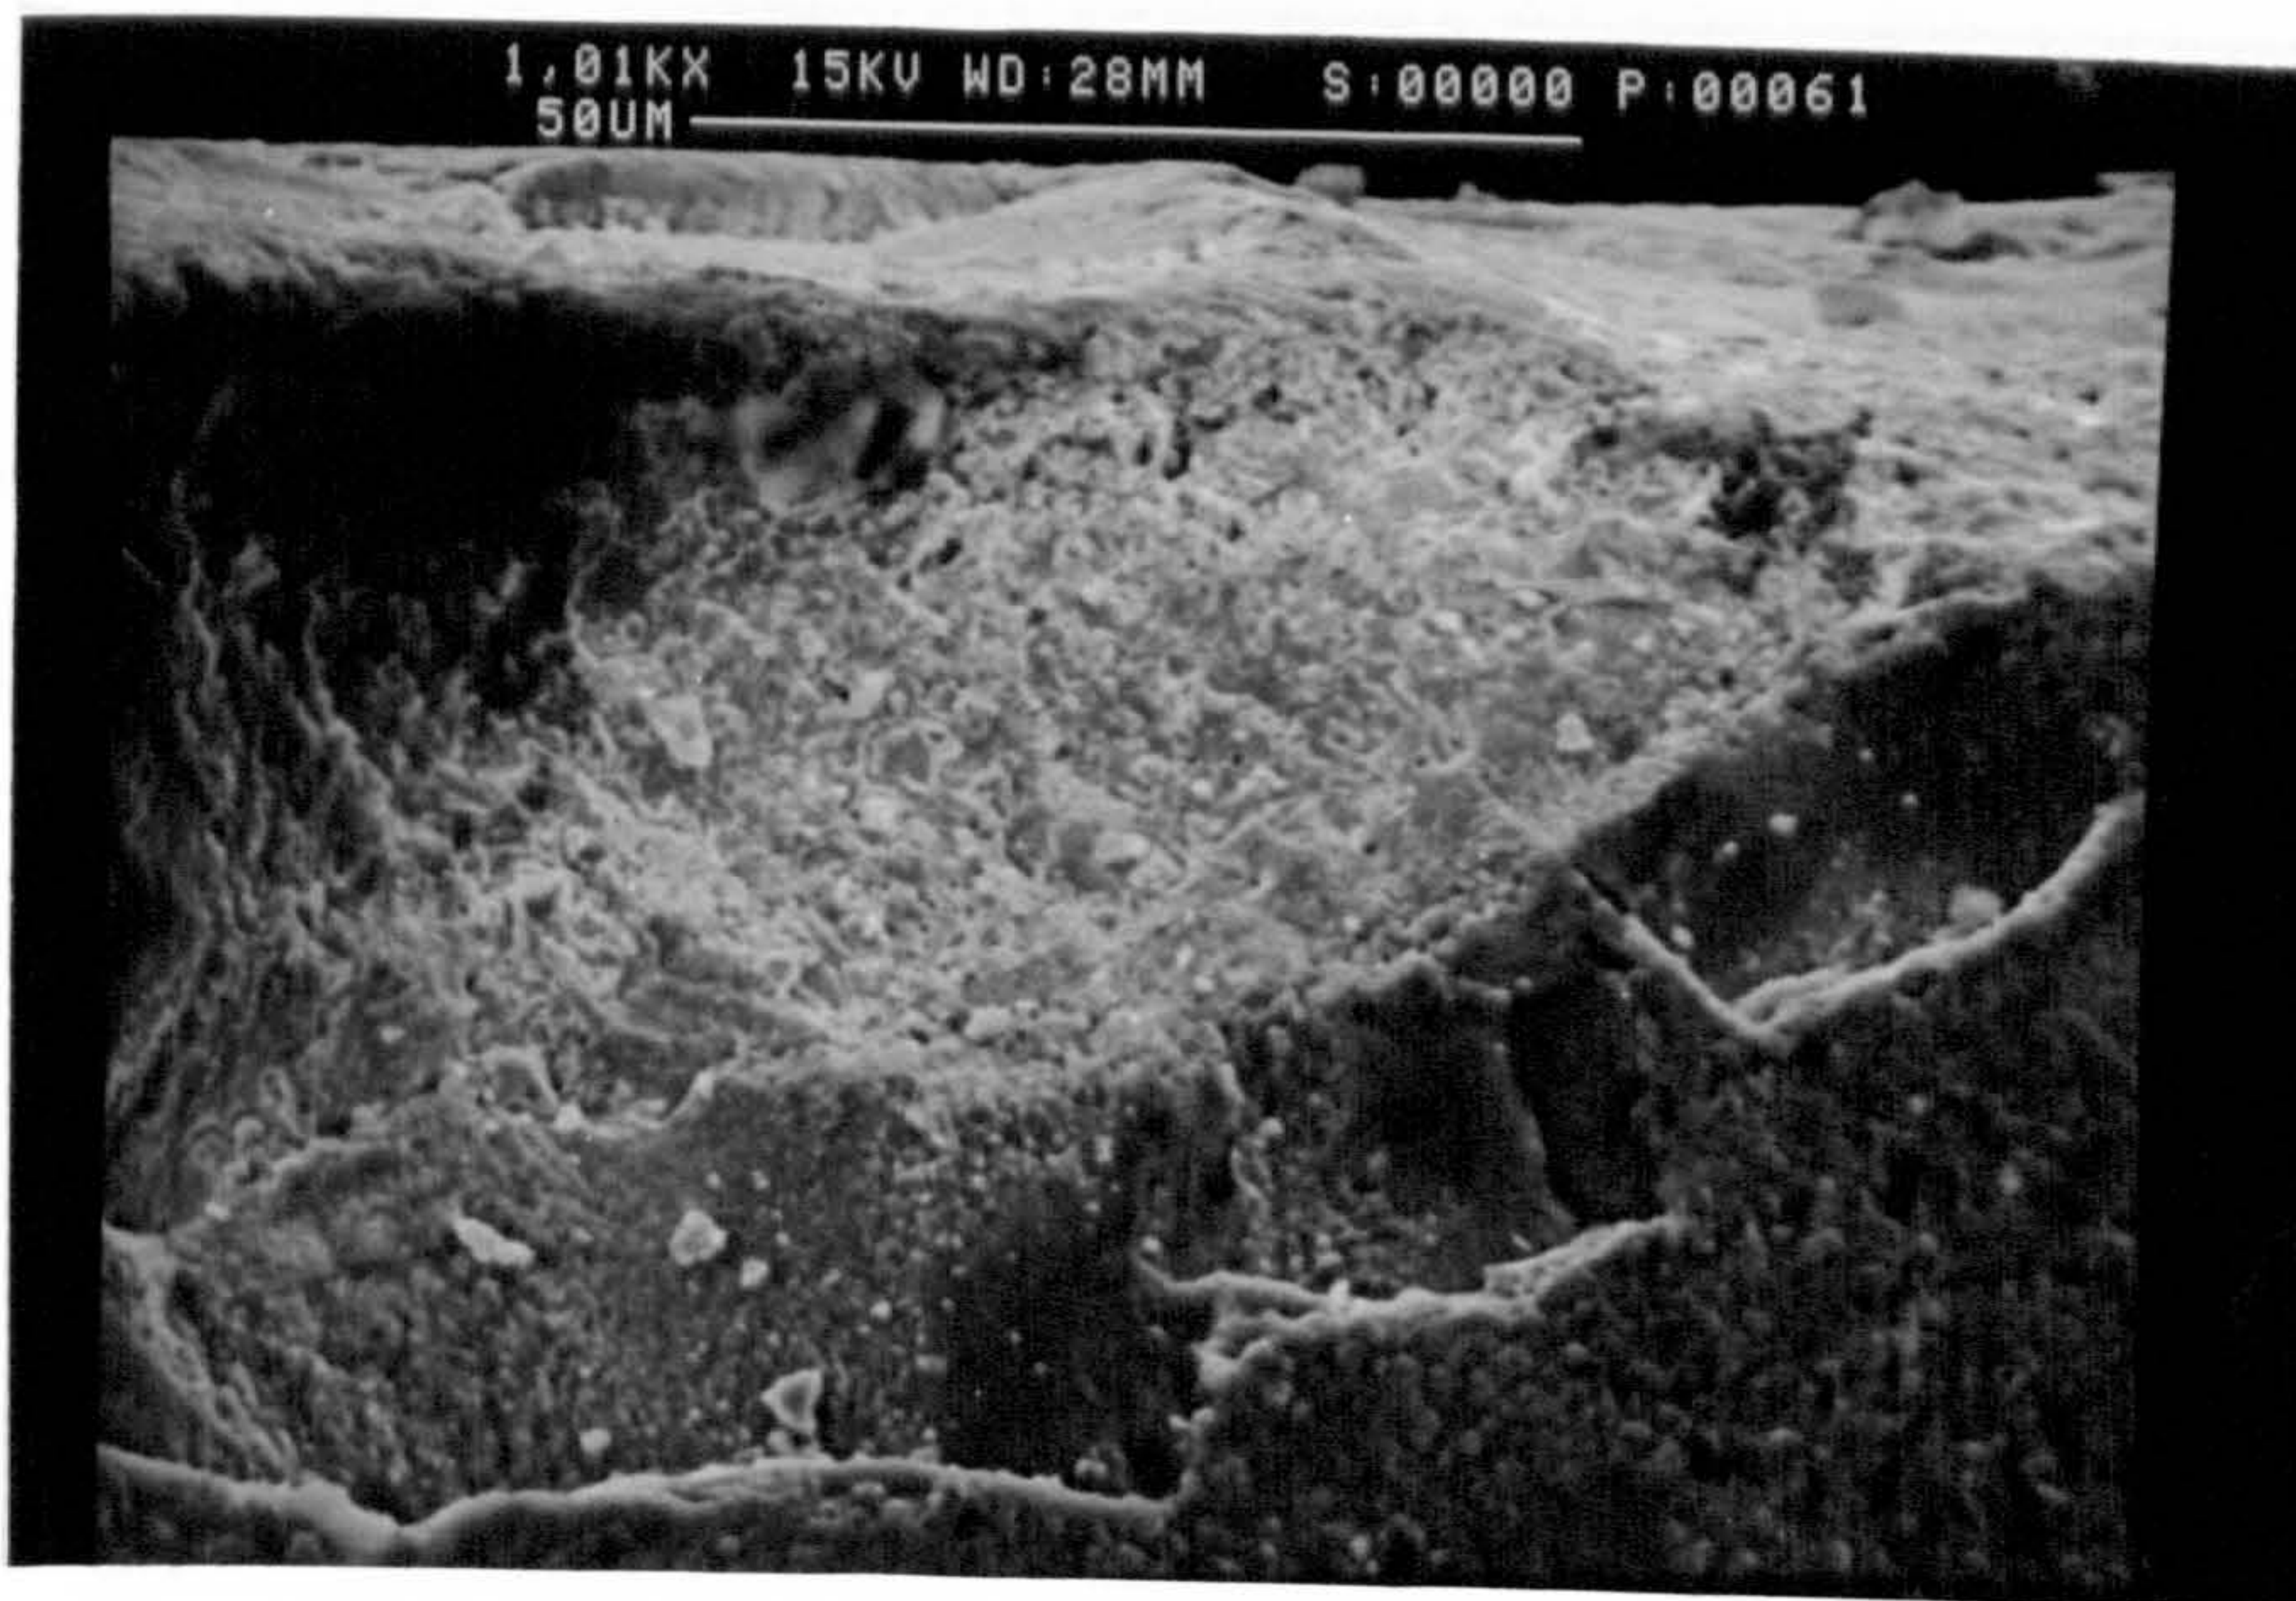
Enlarged view of fractured area near the secondary cutting edge of a triple-coated carbide tool
